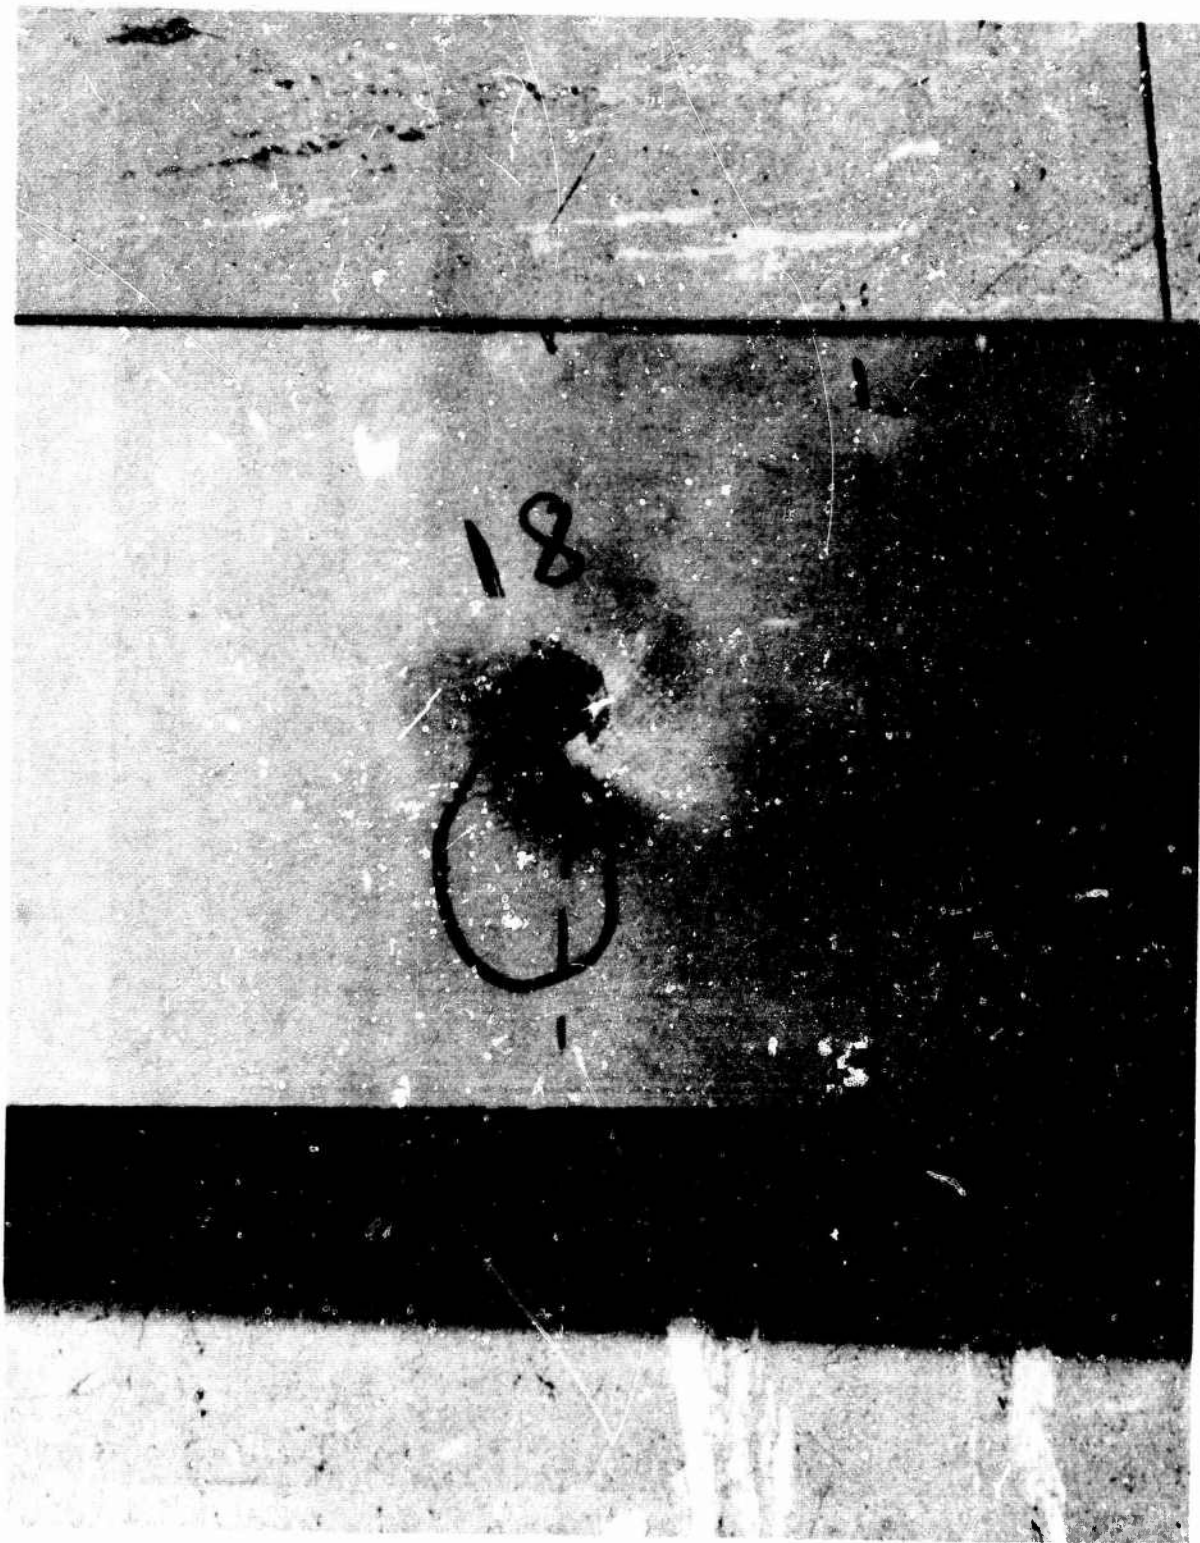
Blade Root-End Fatigue Test, Rear Face of Spar, Fatigue Crack.
